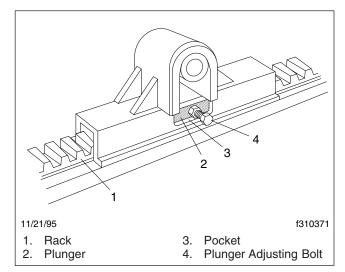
, Holland Fifth Wheel Sliding Mechanism
